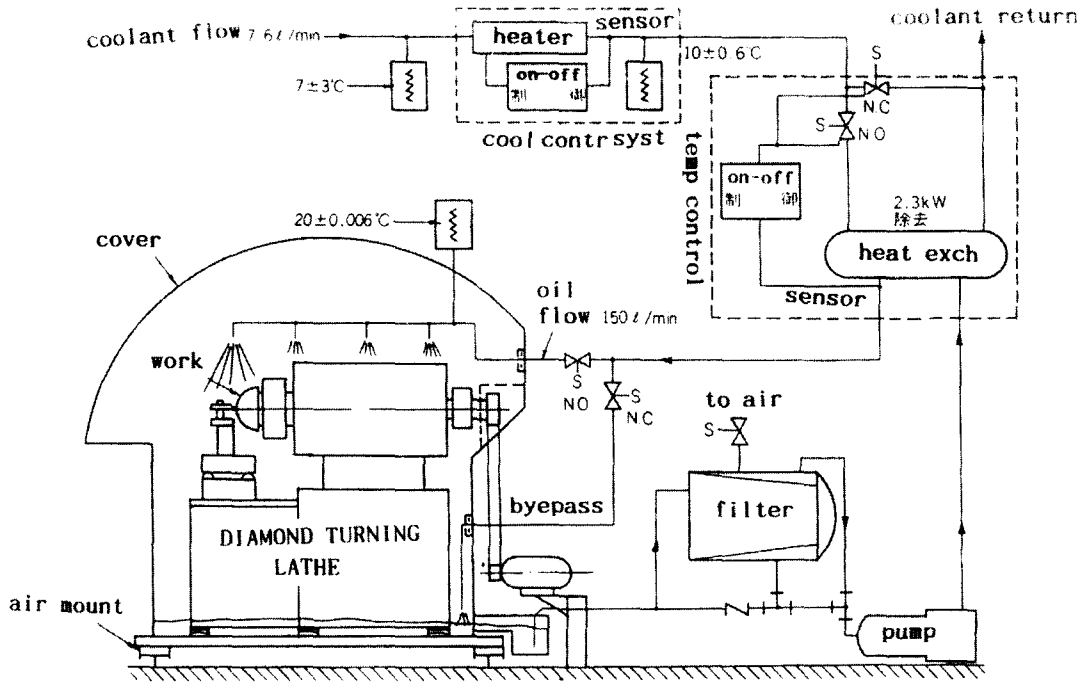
Concerts of oil shower for ultraprecision machine tools
